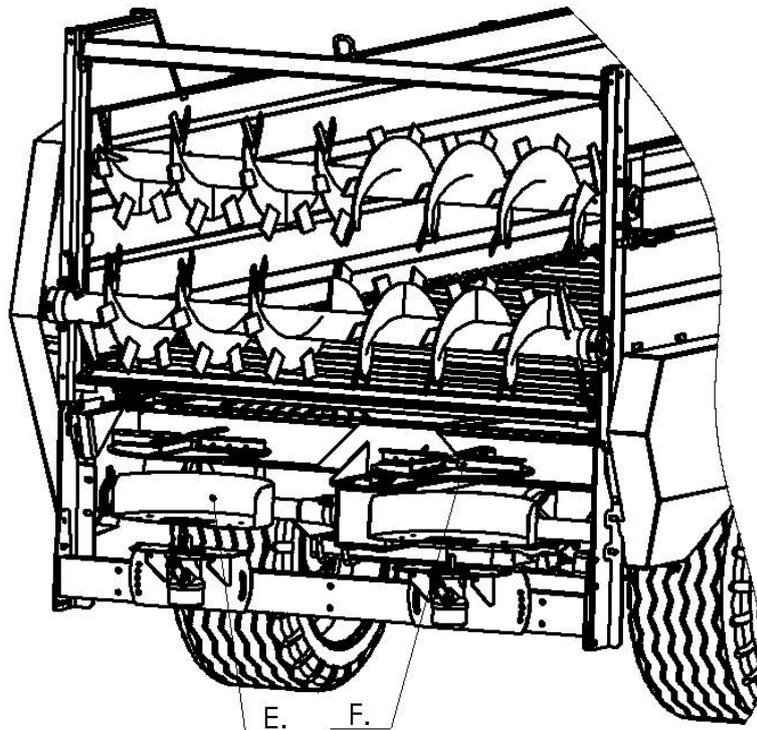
Step 4 - Bolt the mounts of guards (E) and mount discs (F), paying attention to the groove for the key.
